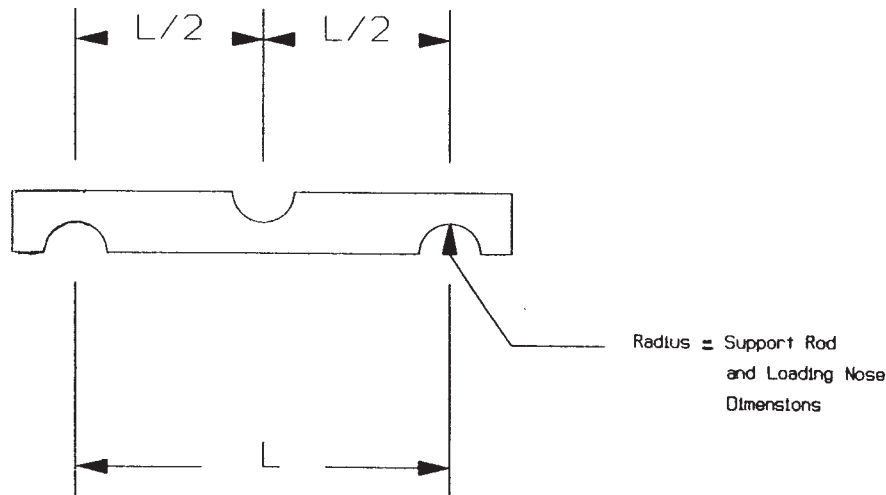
Fixture Used to Set Loading Nose and Support Spacing and Alignment
